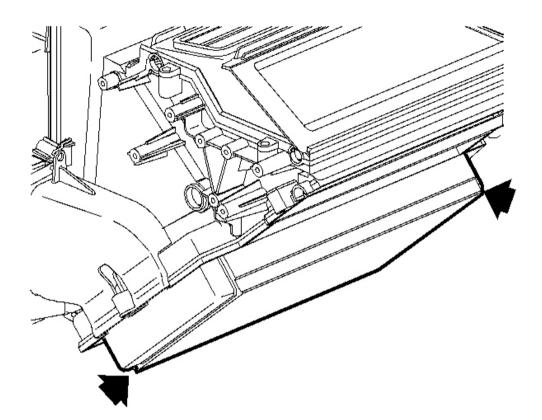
Heater Core Cover, Screws & Evaporator Case Assembly Courtesy of GENERAL MOTORS CORP.
